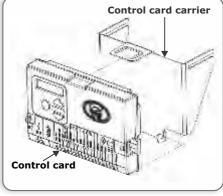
CONTROL CARD CARRIER ASSEMBLY
